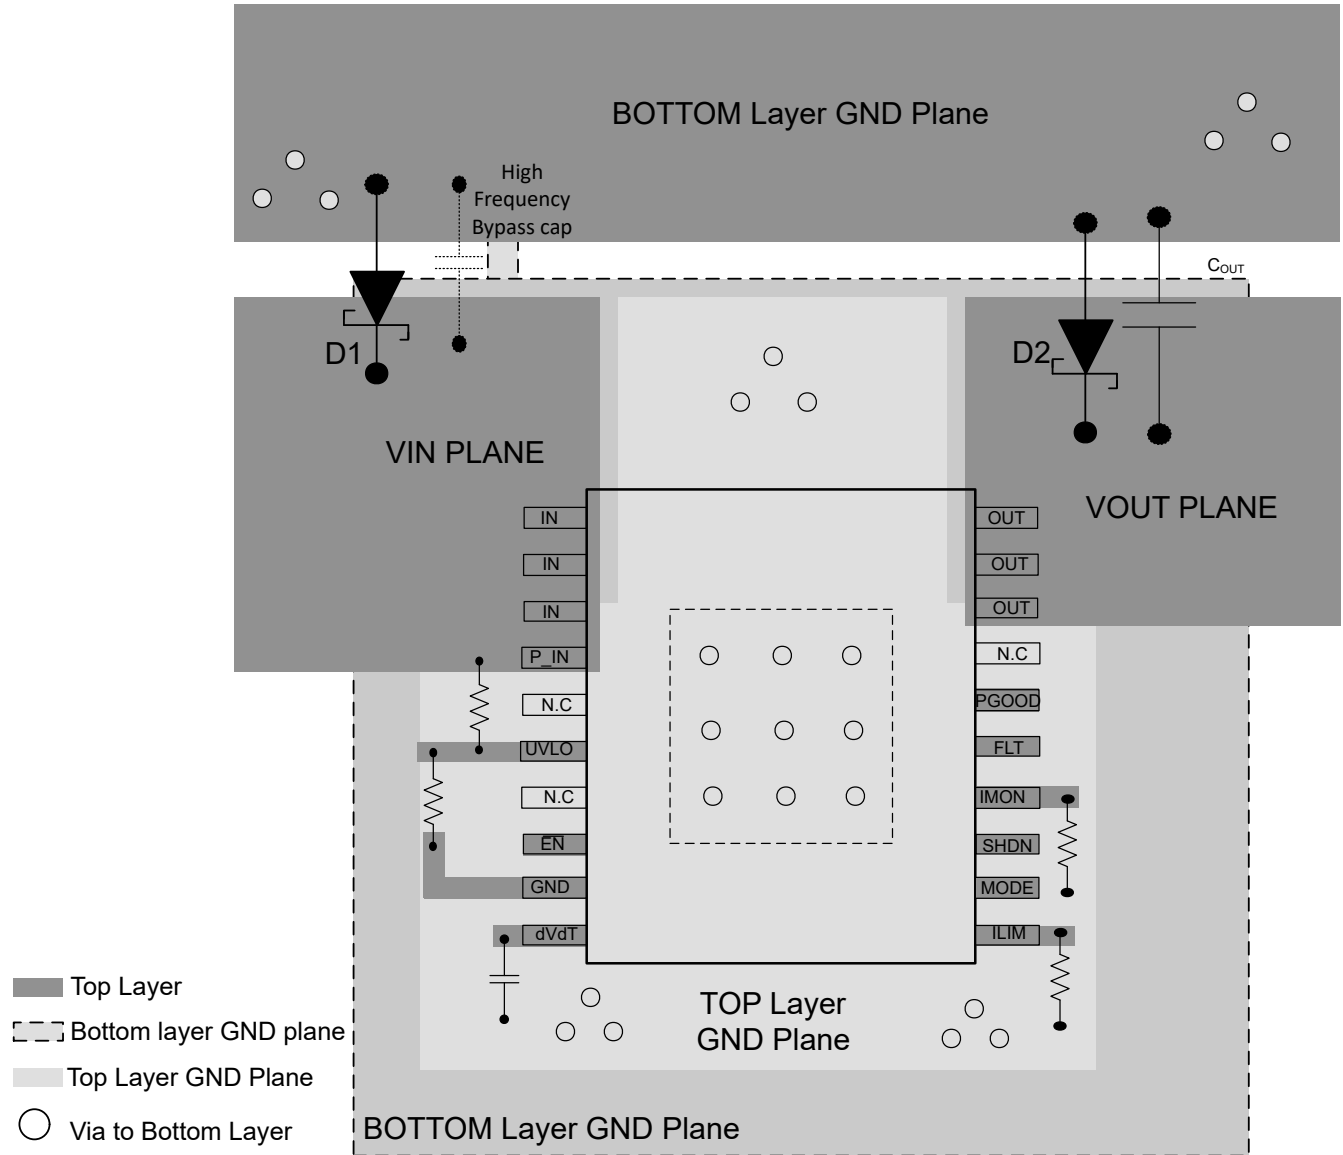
PCB Layout Example With QFN Package With a 2-Layer PCB
